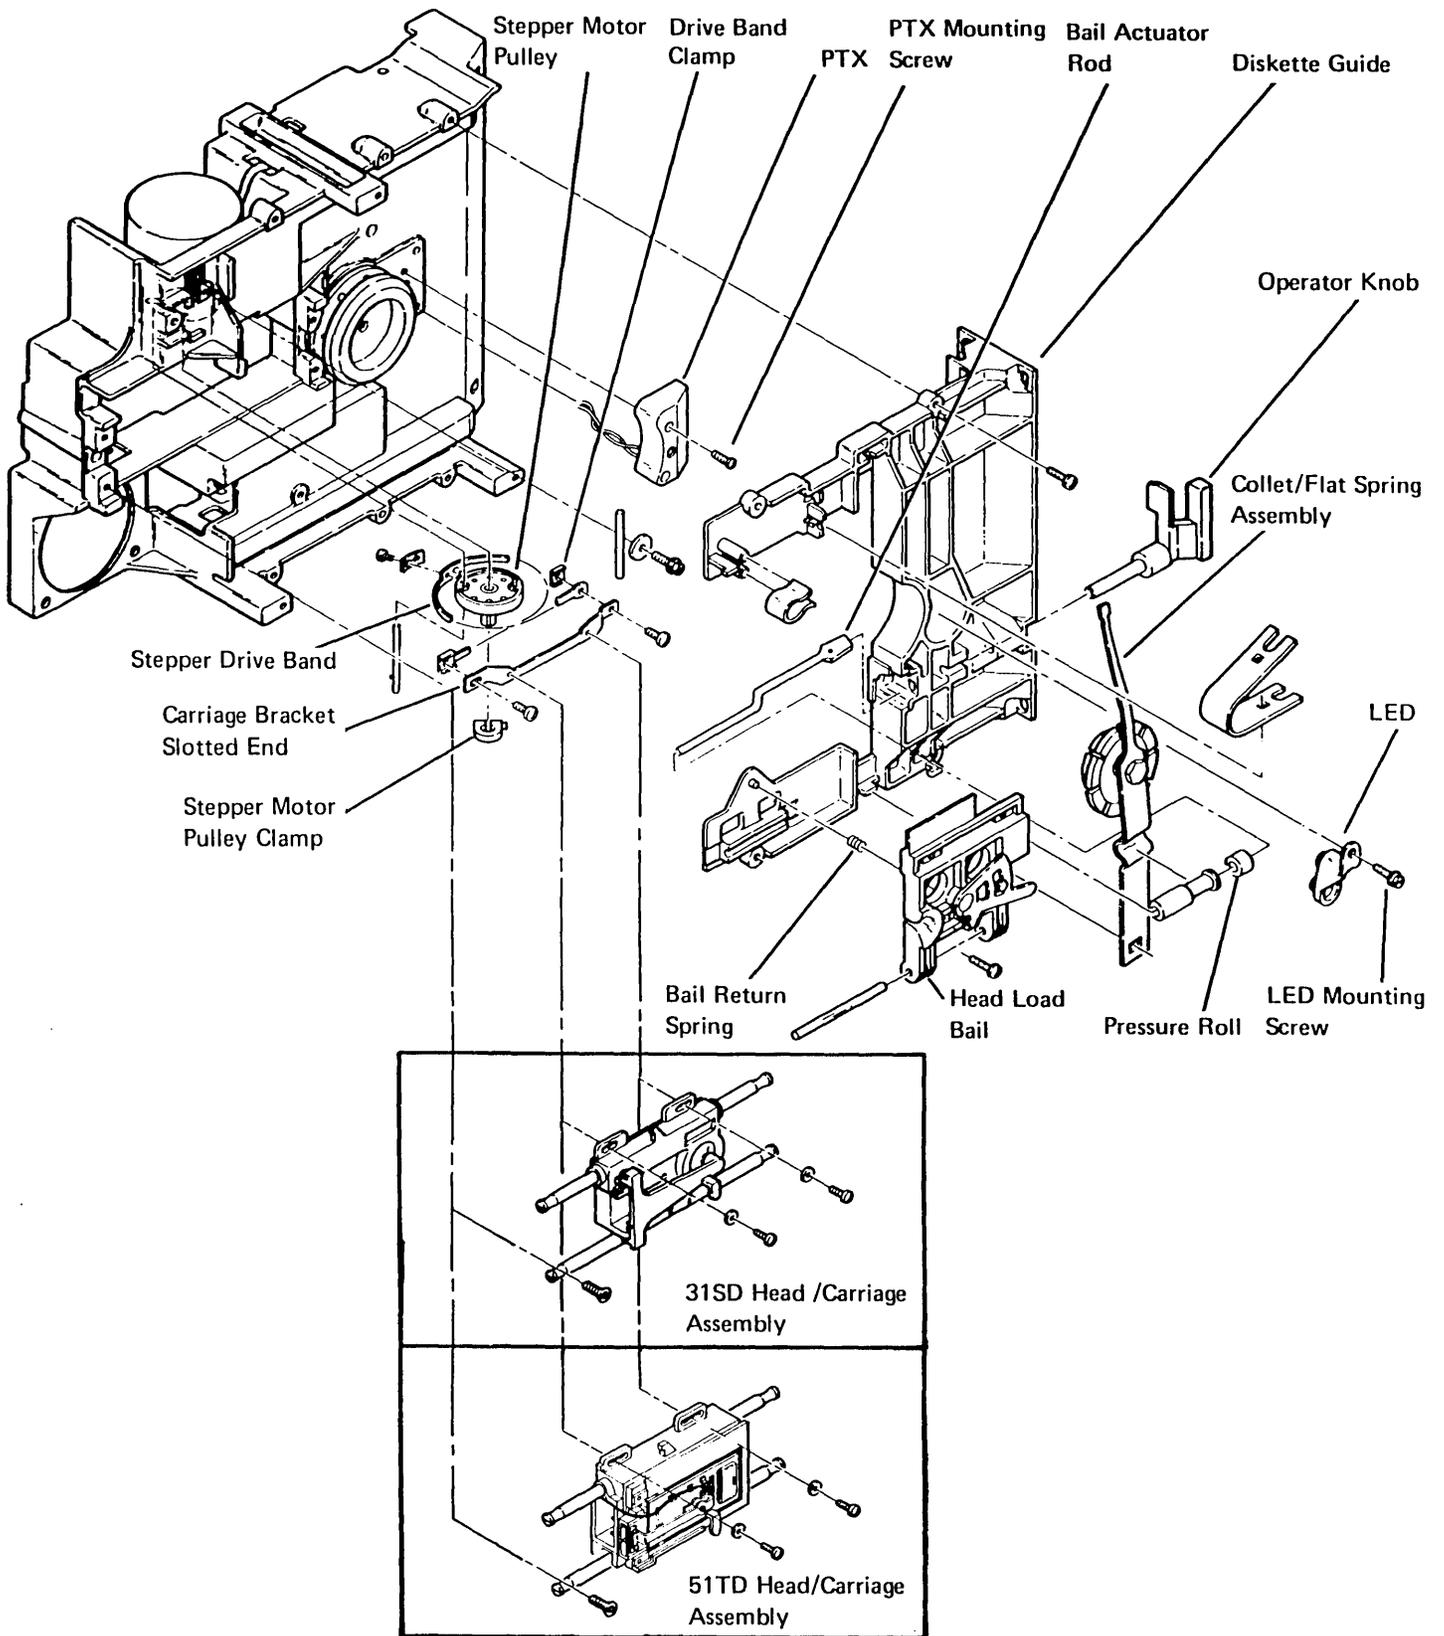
(Part 1 of 4). Diskette Drive Parts
